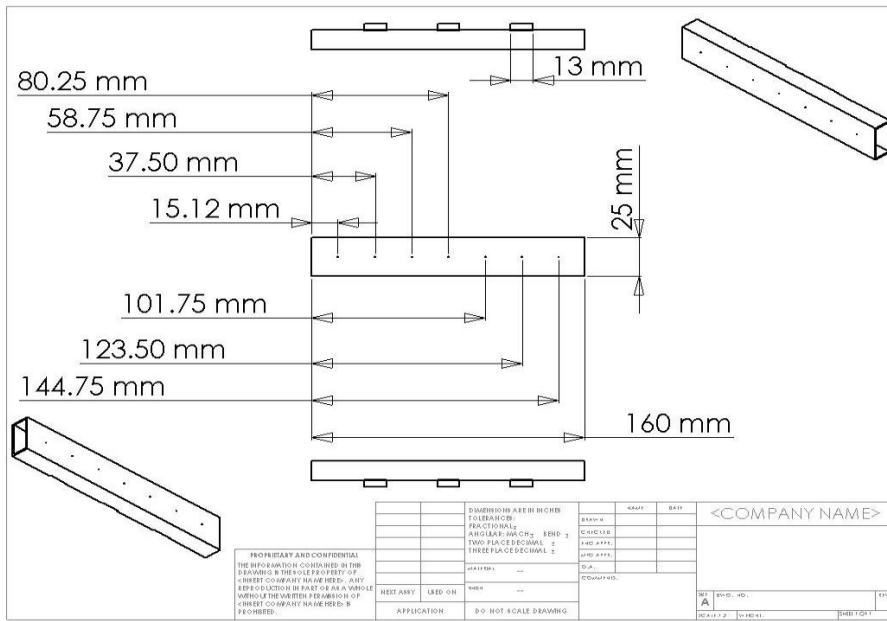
Back view of the PCM filled aluminium box with thermocouple holes
